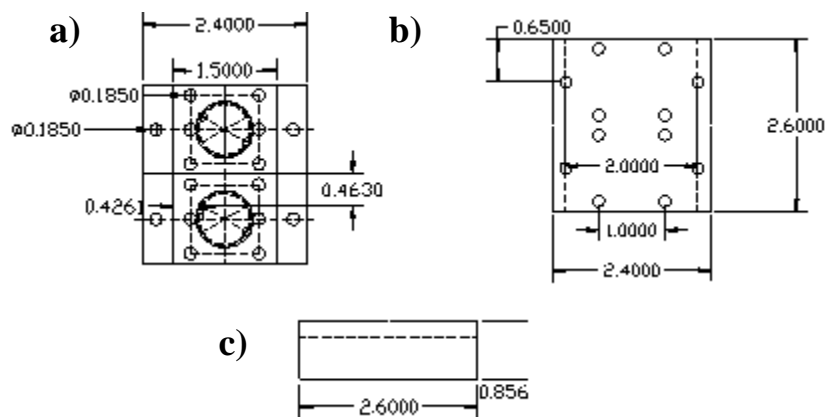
(a) Top, (b) bottom and (c) side view of the otoscope
